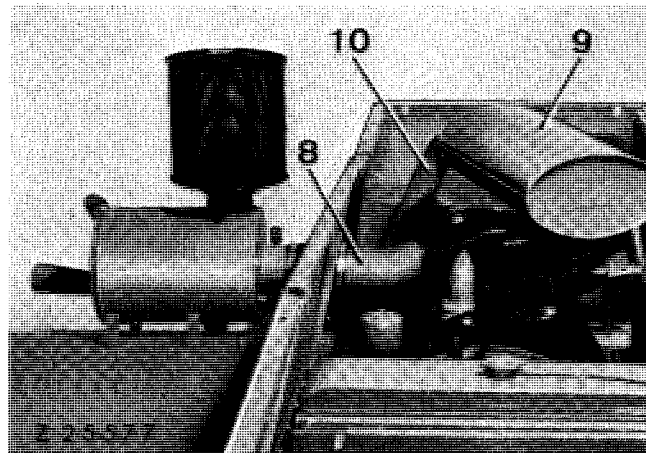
Preparing to Remove Engine (1985 Combine Shown)
